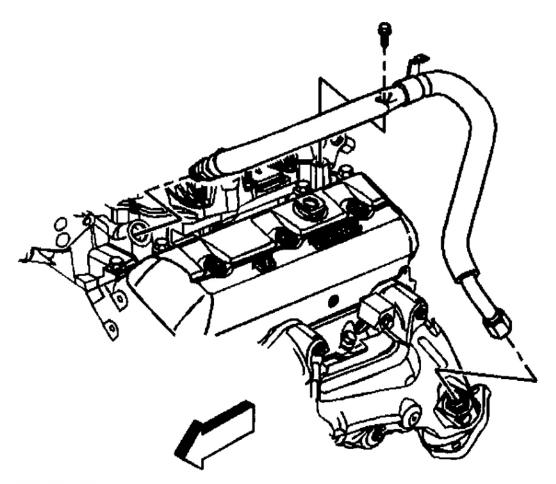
View Of J 41427 & Lower Intake Manifold Courtesy of GENERAL MOTORS CORP.
